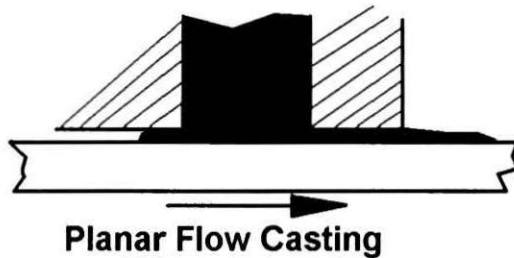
Planar Flow Casting, typical method of chill casting [2]
